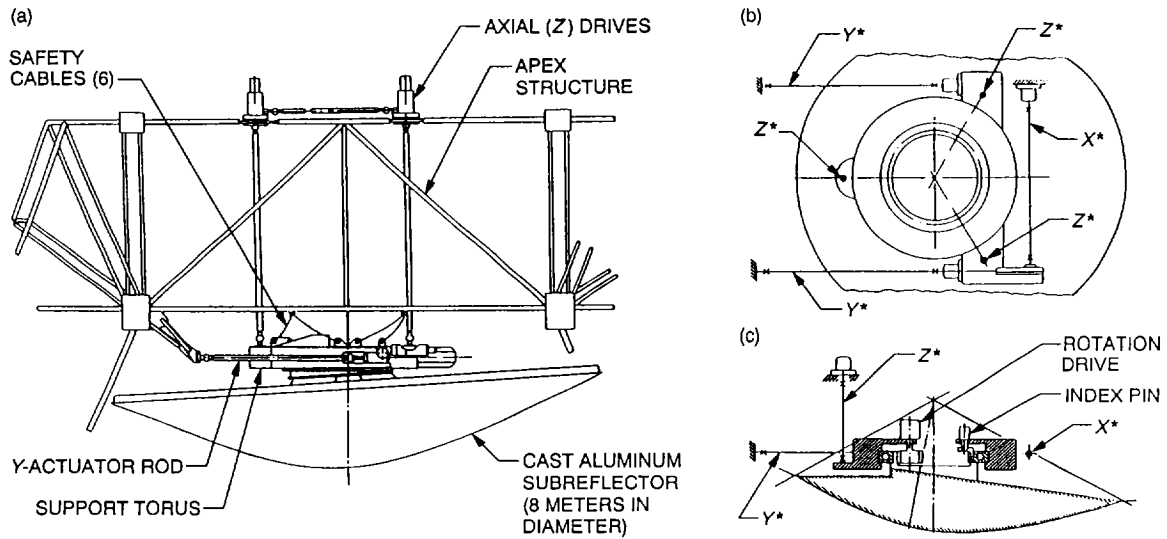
Subreflector and positioner assembly: (a) elevation view, (b) plan view showing rotation bearing and actuator rods (with asterisks), and (c) elevation section showing rotation bearing and actuator rods (with asterisks).
